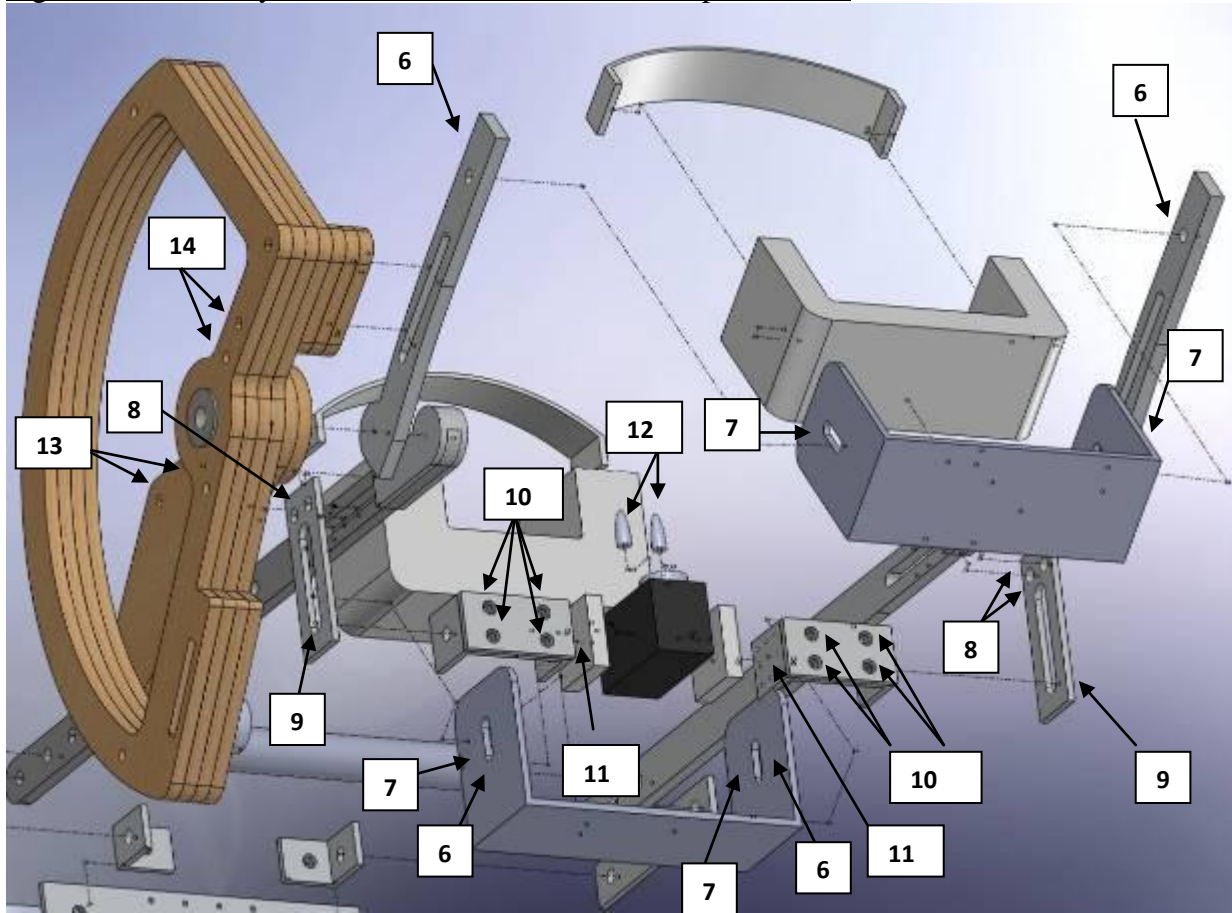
Assembly Skin-Stretch, Arm Cuffs, and Capstan Drive
